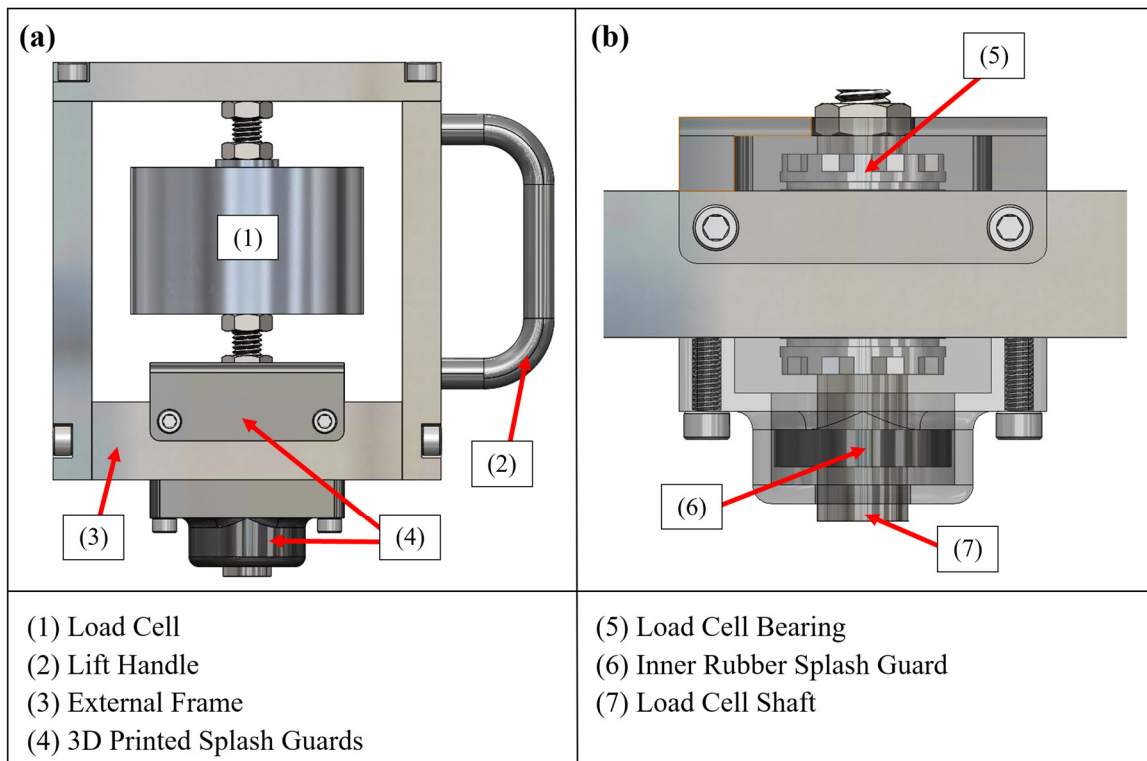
(a) Load Cell Subassembly. (b) Shaft and Bearing Detail View.
